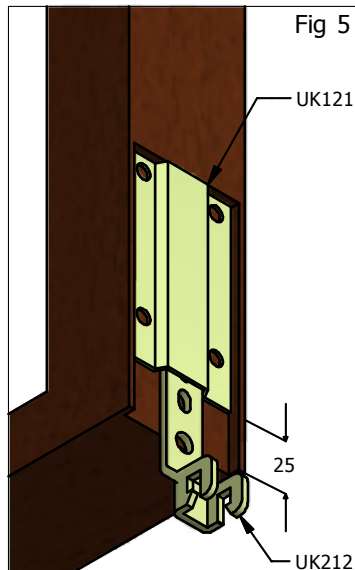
The bottom edge of the UK121 bracket must be 25mm up from the bottom of the sash. Always fix through all four fixing holes.
